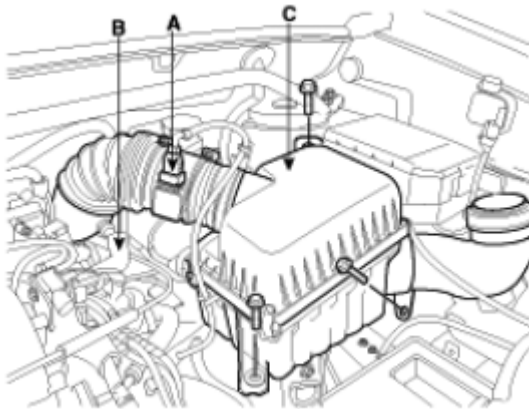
Identifying AFS Connector, Breather Hose With Intake Air Hose And Air Cleaner Assembly
